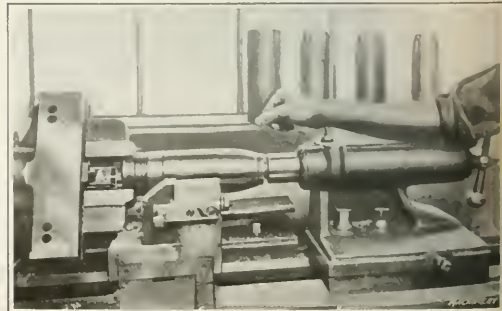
Finish-turning External Diameter on an Engine Lathe
